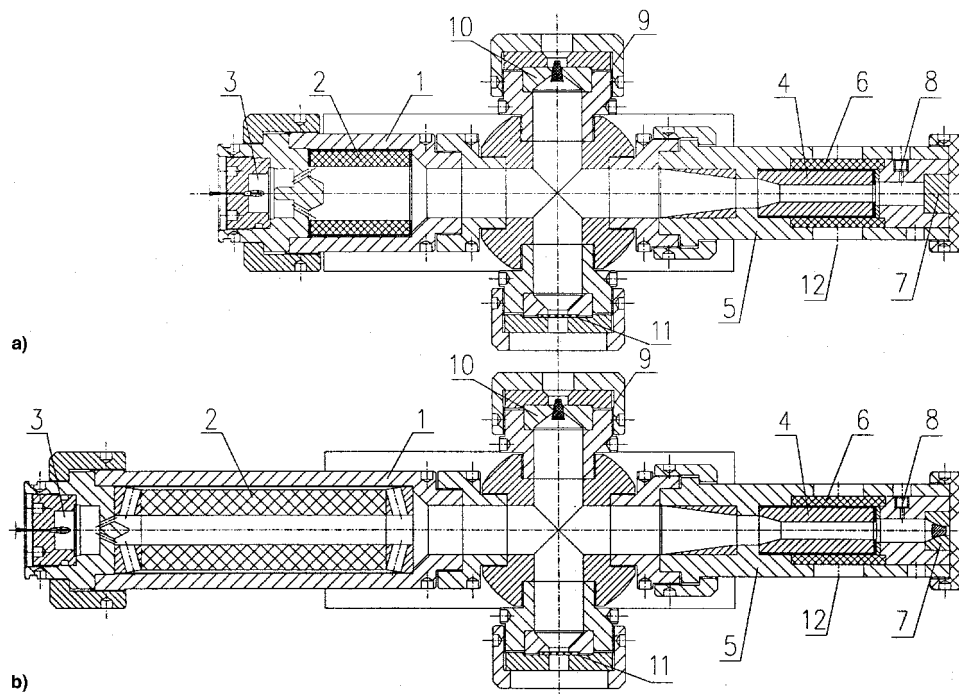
Test motor assembly. Configurations for a) base and b) erosive burning measurements. 1, chamber of the gas-generating section; 2, gas-generating charge; 3, igniter; 4, measuring pill; 5, chamber of the measuring section; 6, covering; 7, erosive nozzle; 8, pressure transducer port; 9, nozzle section; 10, exit nozzle; 11, membrane section; and 12, microwave viewing port.
